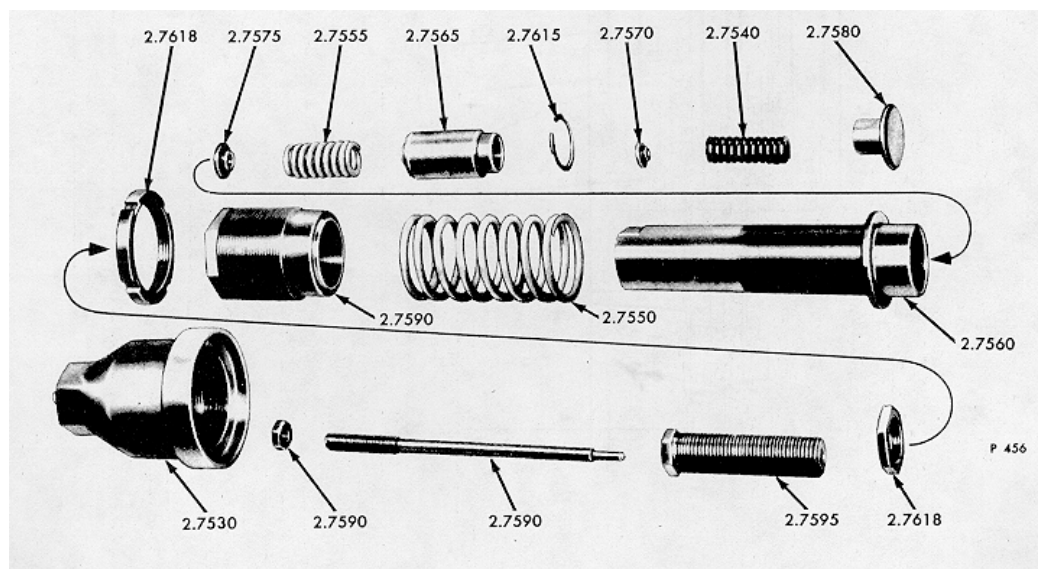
B FUEL MODULATING GOVERNOR SPEED SPRINGS AND CAP
